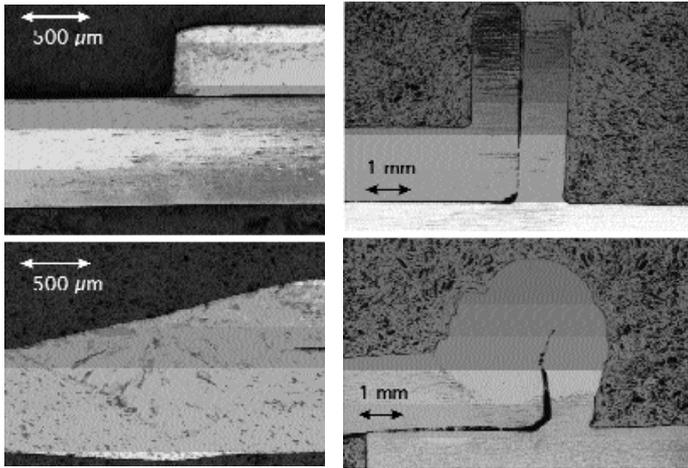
Cosmetic weld to avoid crevice corrosion (ref 2)
